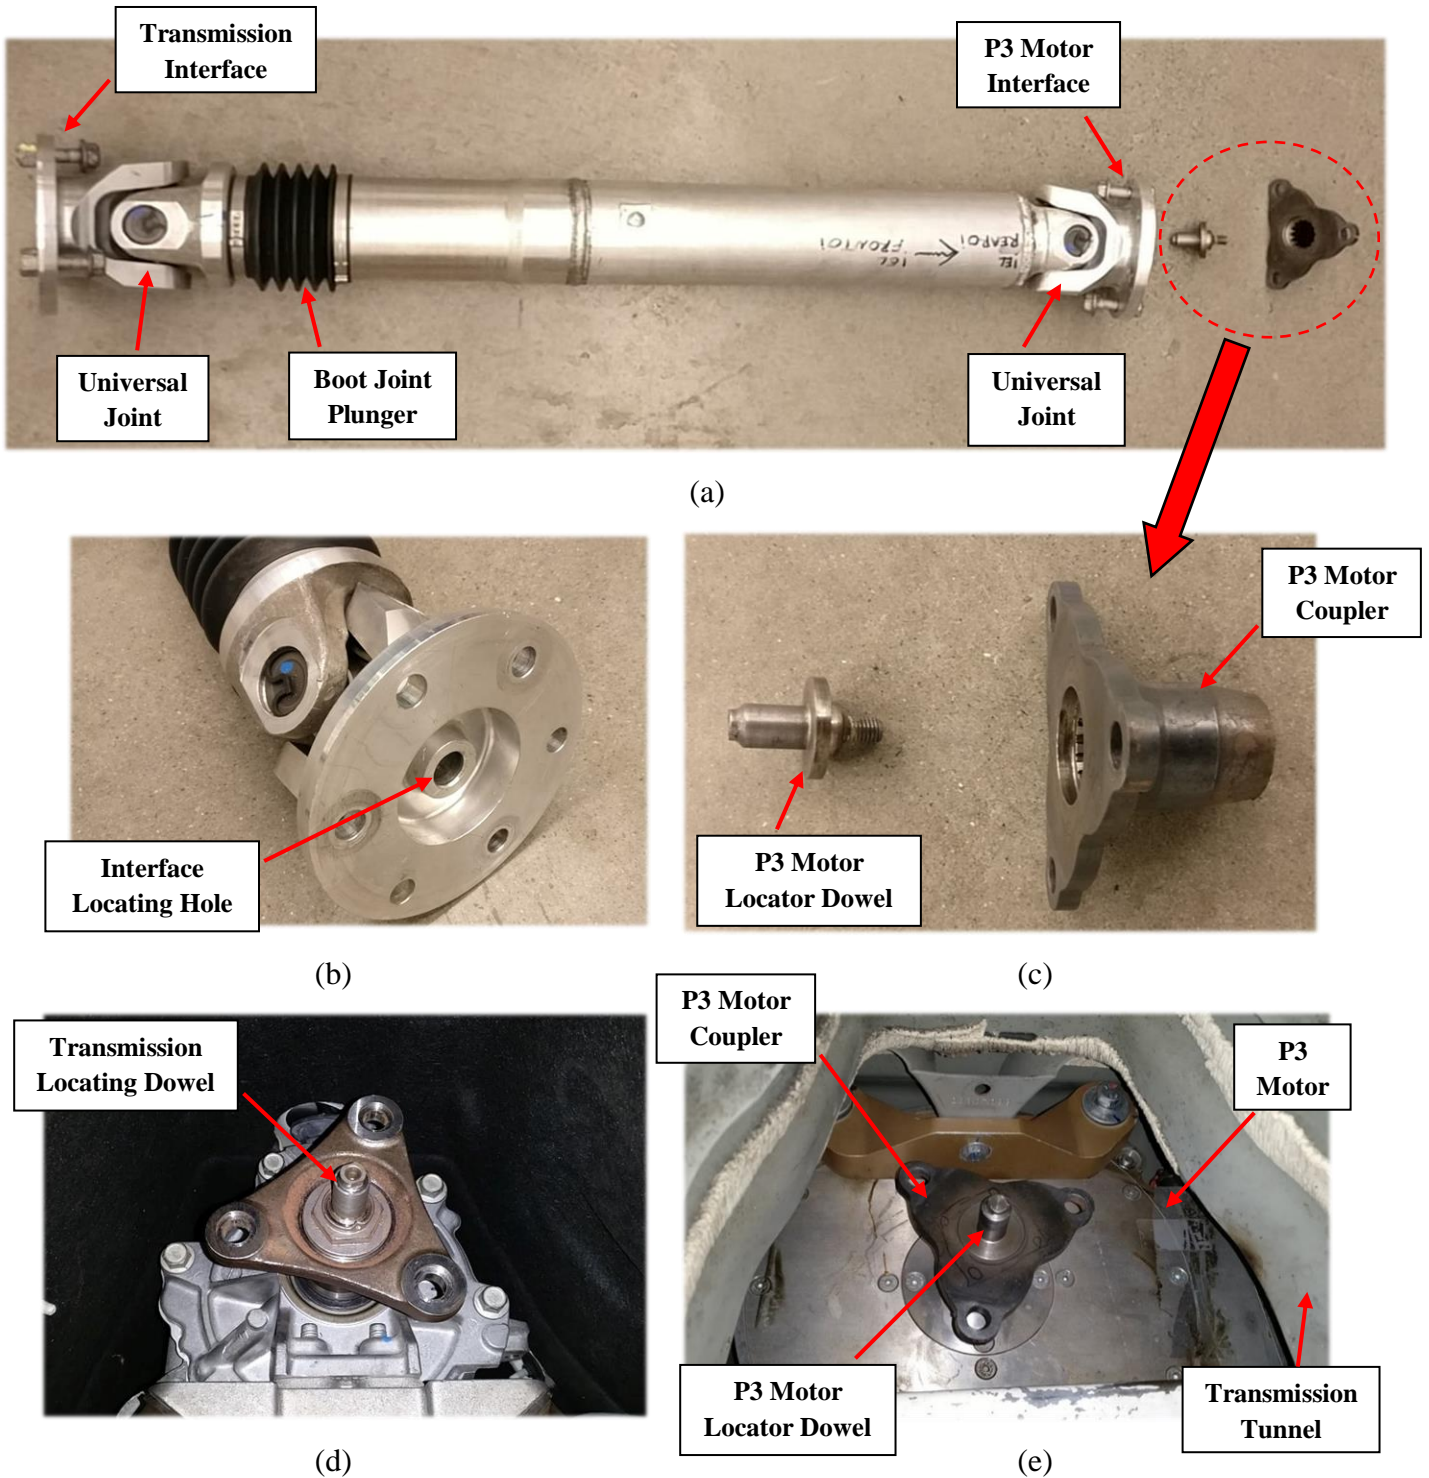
New Driveshaft Design – (a) driveshaft, (b) driveshaft locating hole, (c) P3 motor locator dowel and coupler, (d) transmission locating dowel, (e) installed P3 motor locator dowel and coupler
